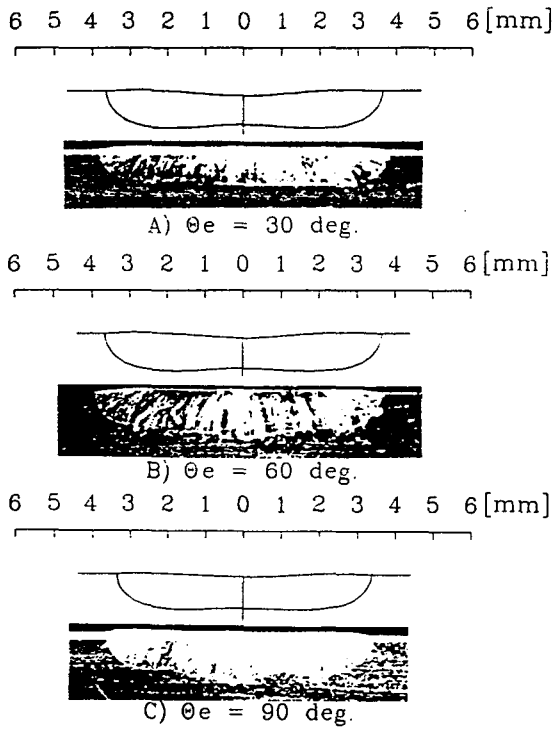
Fusion shapes with electrode angle for  $I=150 \text{ A}$  and  $La=3.0 \text{ mm}$  after 2 sec welding
